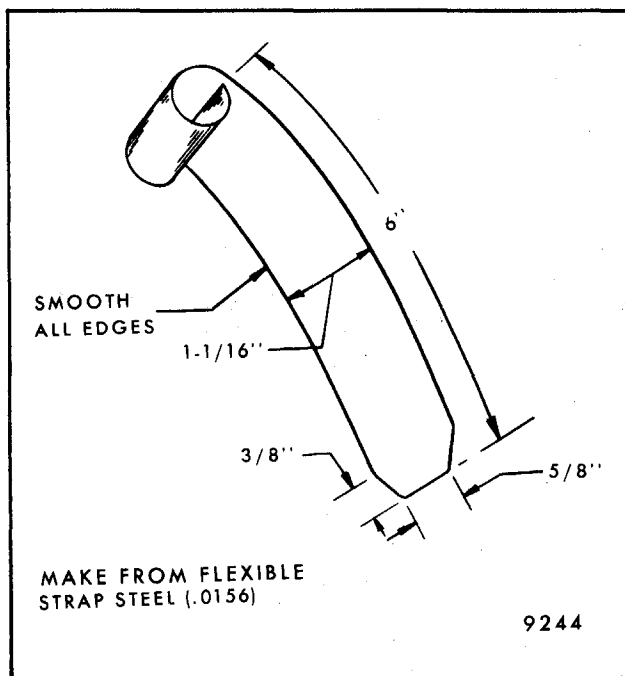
Head Restraint Antiremoval Lock Releasing Tool
